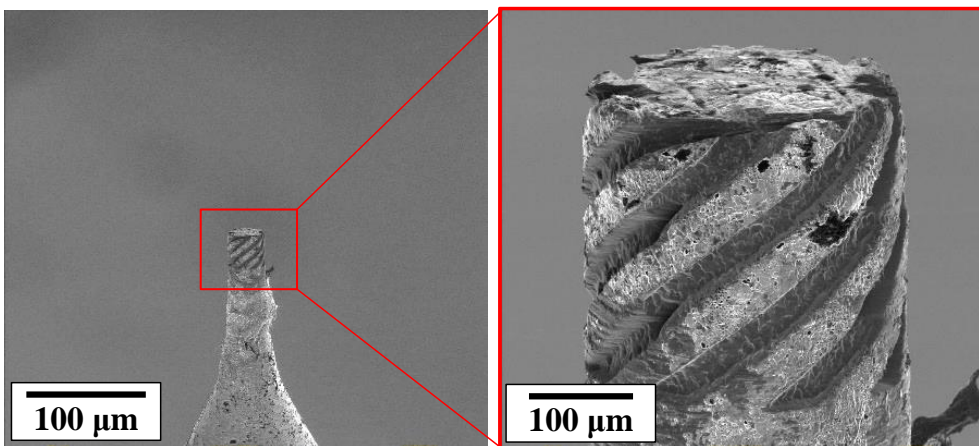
45° helical edge micro milling tool fabricated by FIB
